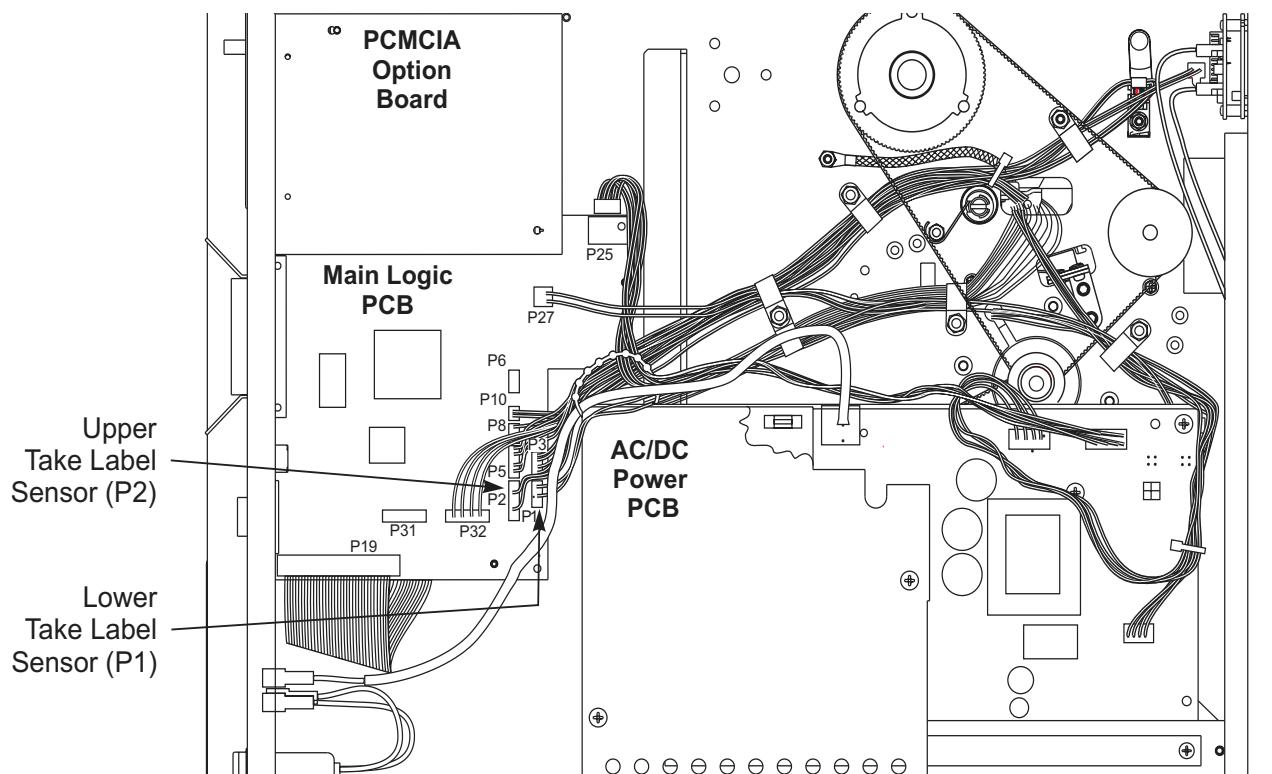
Sensor Connector Location (Printer Configurations 10500-2XXX-XXXX and 10500-3XXX-XXXX)
